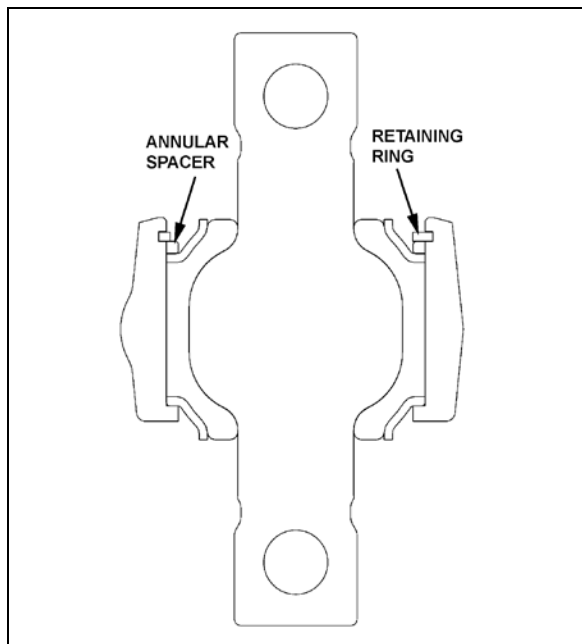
LOWER A-ARM BALL JOINTS 16114
